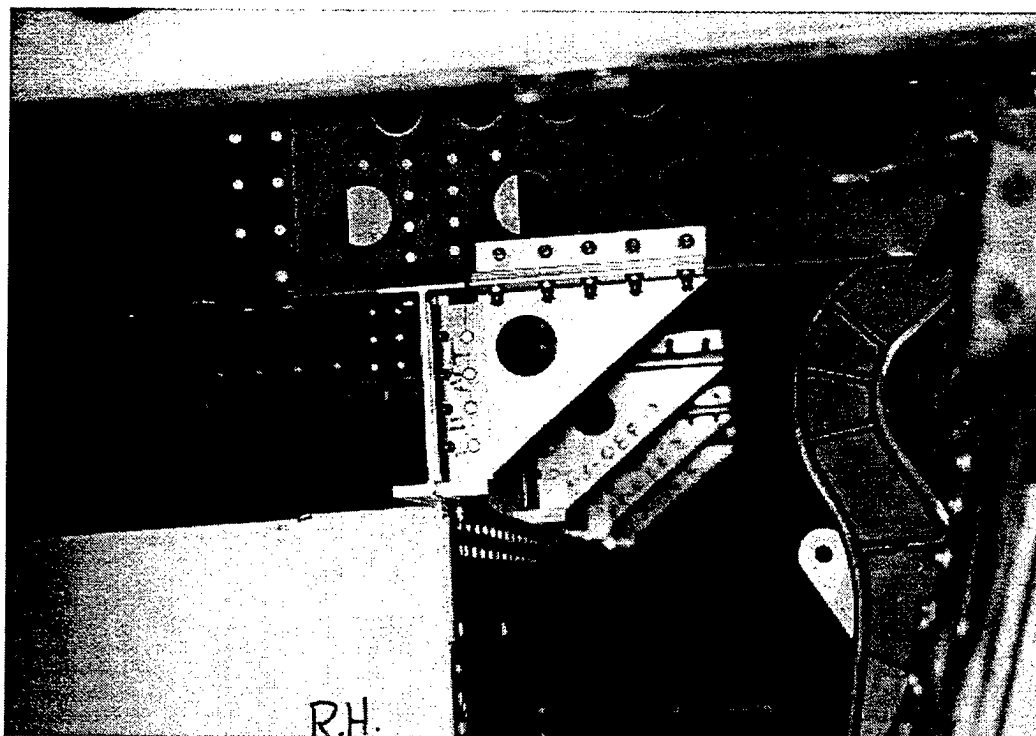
PRETEST AUXILIARY FUEL TANK RIGHT ATTACHMENT FRAMEWORK
